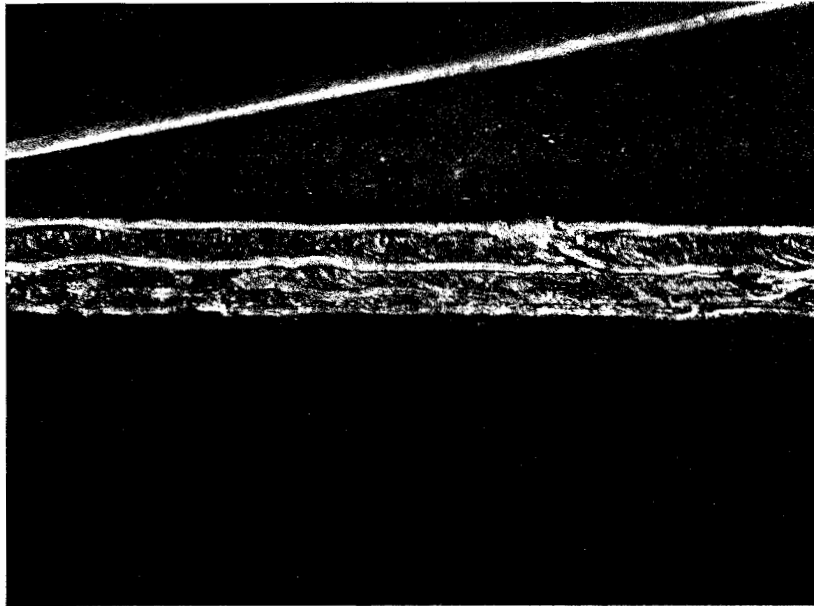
Treatment of inter-pass weld toe and weld spatter
